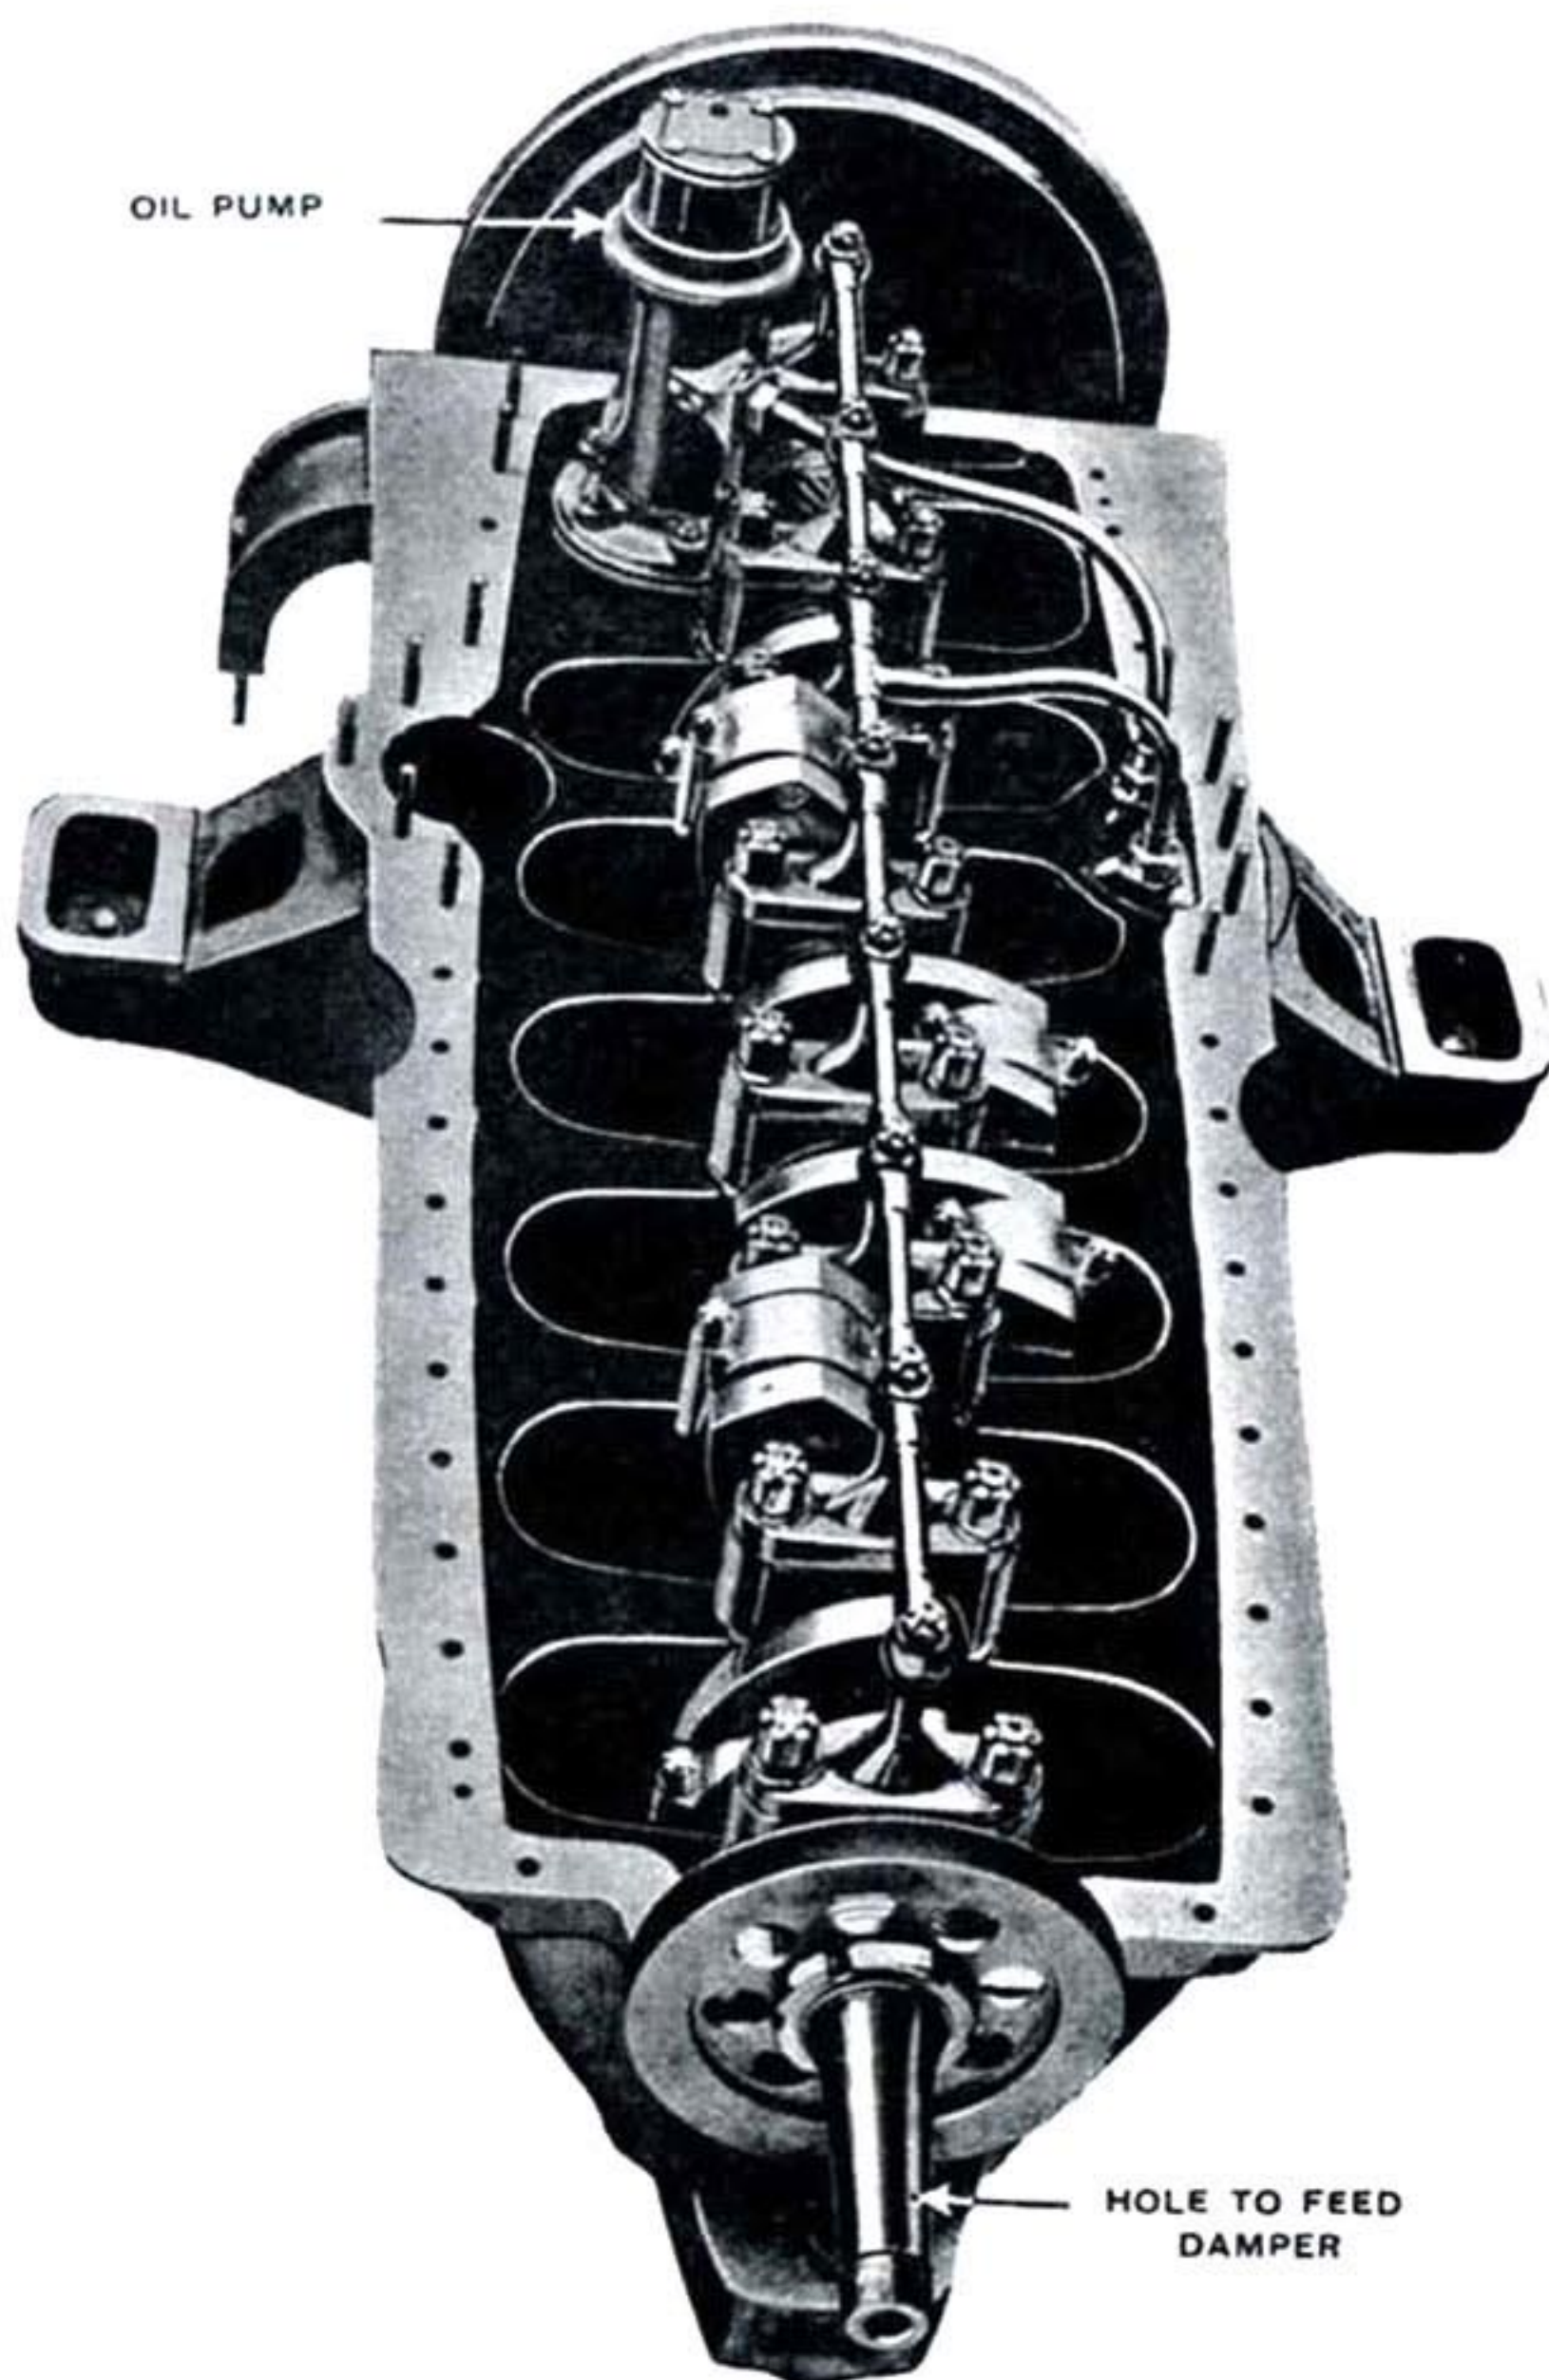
OIL FEED PIPES FROM PUMP TO MAIN BEARINGS.
